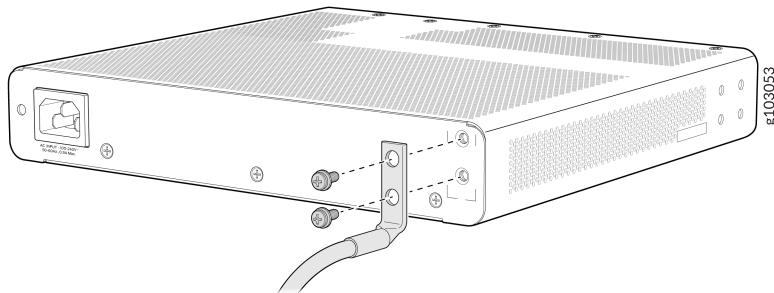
Connect a Grounding Cable to an EX4000-12P or EX4000-12MP Switch
